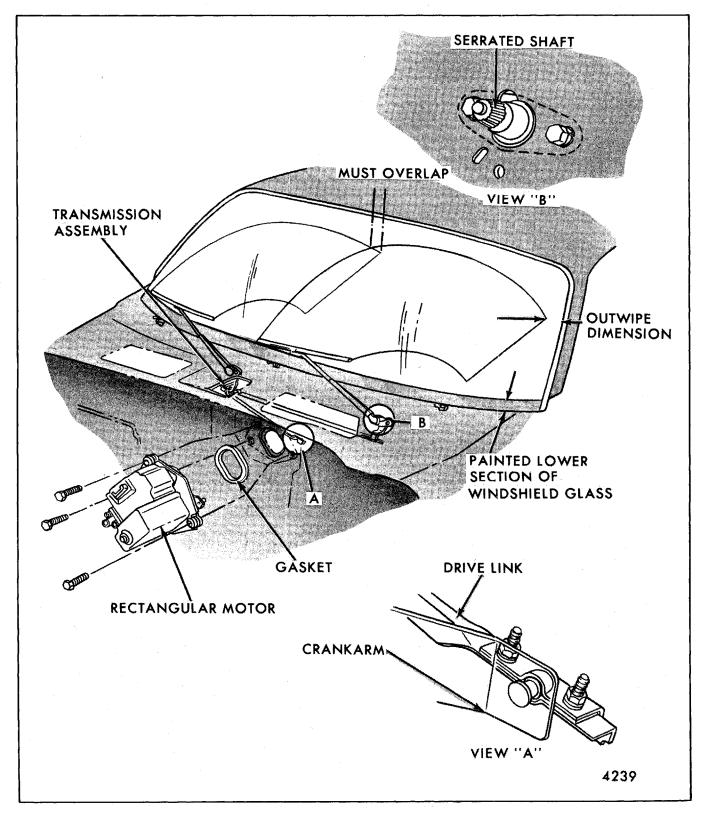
Wiper Installation and Wipe Pattern - X Styles
